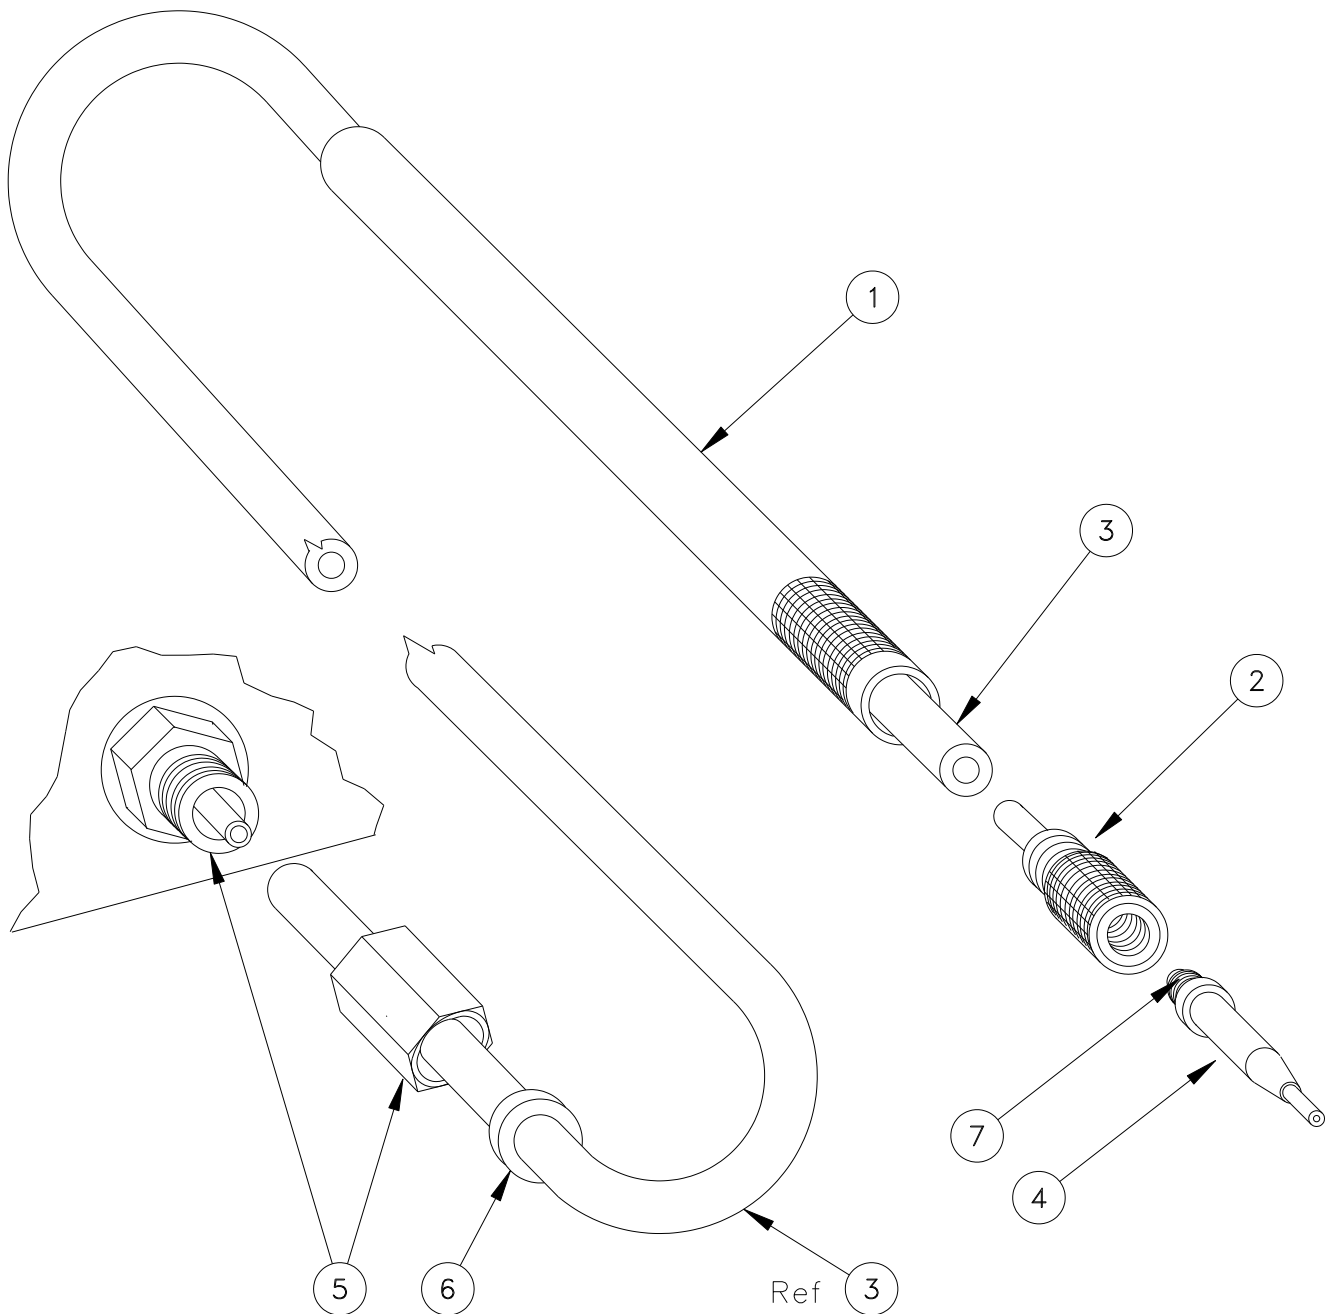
P/N MB1290-7^[1] (-8) MODULATOR ASSEMBLY
